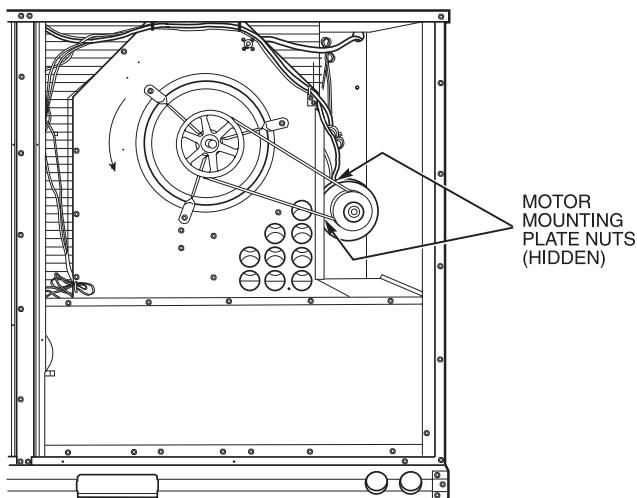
Typical Belt-Drive Motor Mounting for Sizes 009-014
